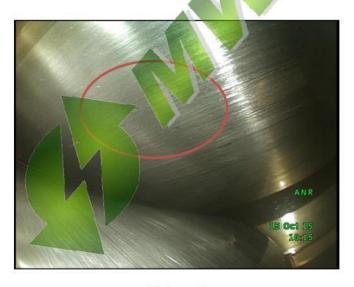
shows the bearing of the third planet wheel. Surface of the inner guide ring is roughened.
